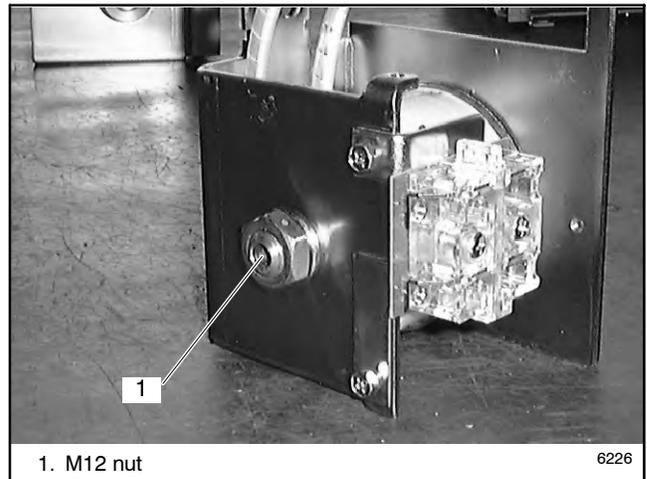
Closing Coil with Frame, 100-400 Amp Models
